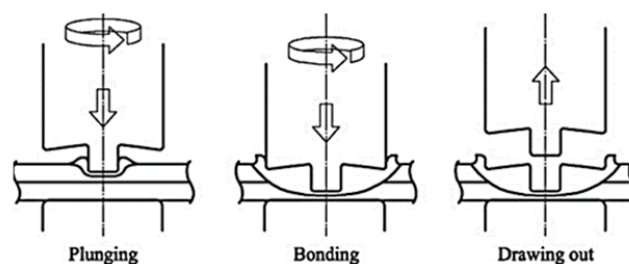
A schematic illustration of the spot friction welding process [8]
